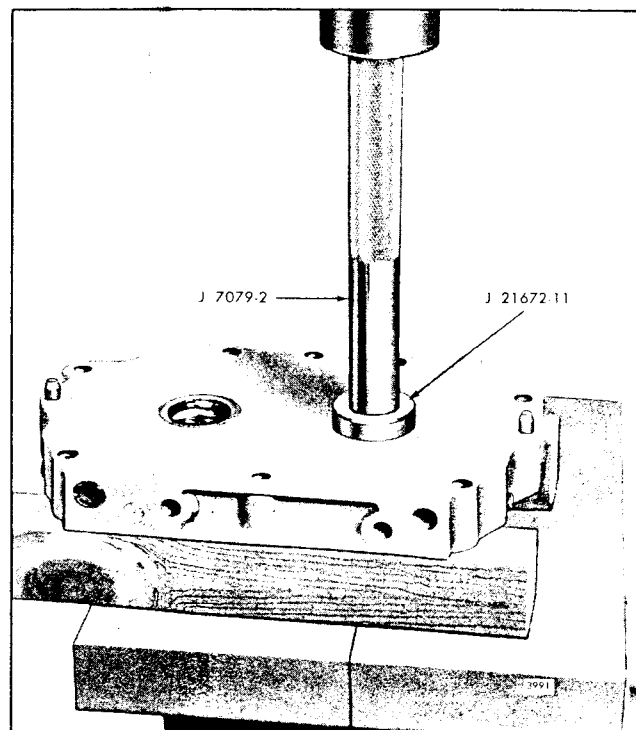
Removing Oil Seal and Roller Bearing from Rear End Plate (Former Blower)
